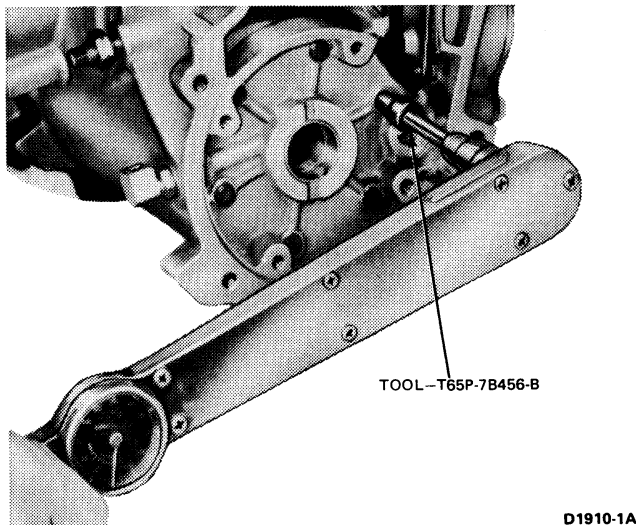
Installing One-Way Clutch Outer Race Attaching Bolts
